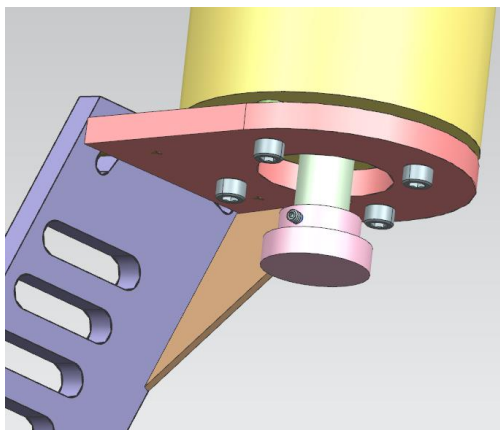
Close-up of the spacing between the motor shaft and its gear.
